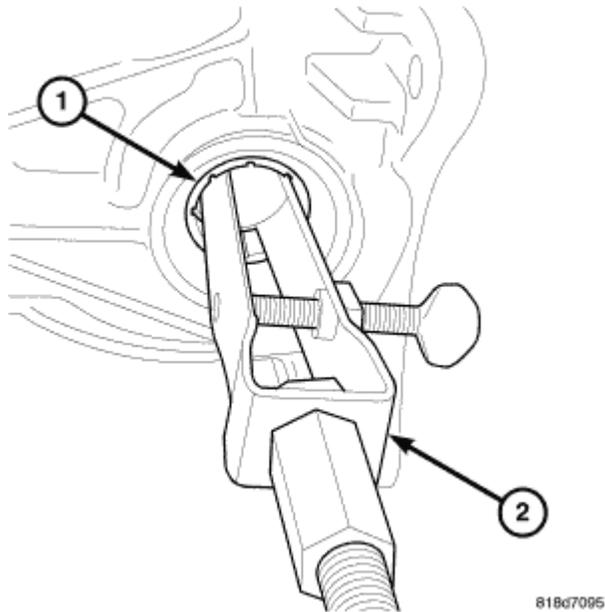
Removing Shaft Bearing/Bushing With Remover 7794-A And Slide Hammer C-637
